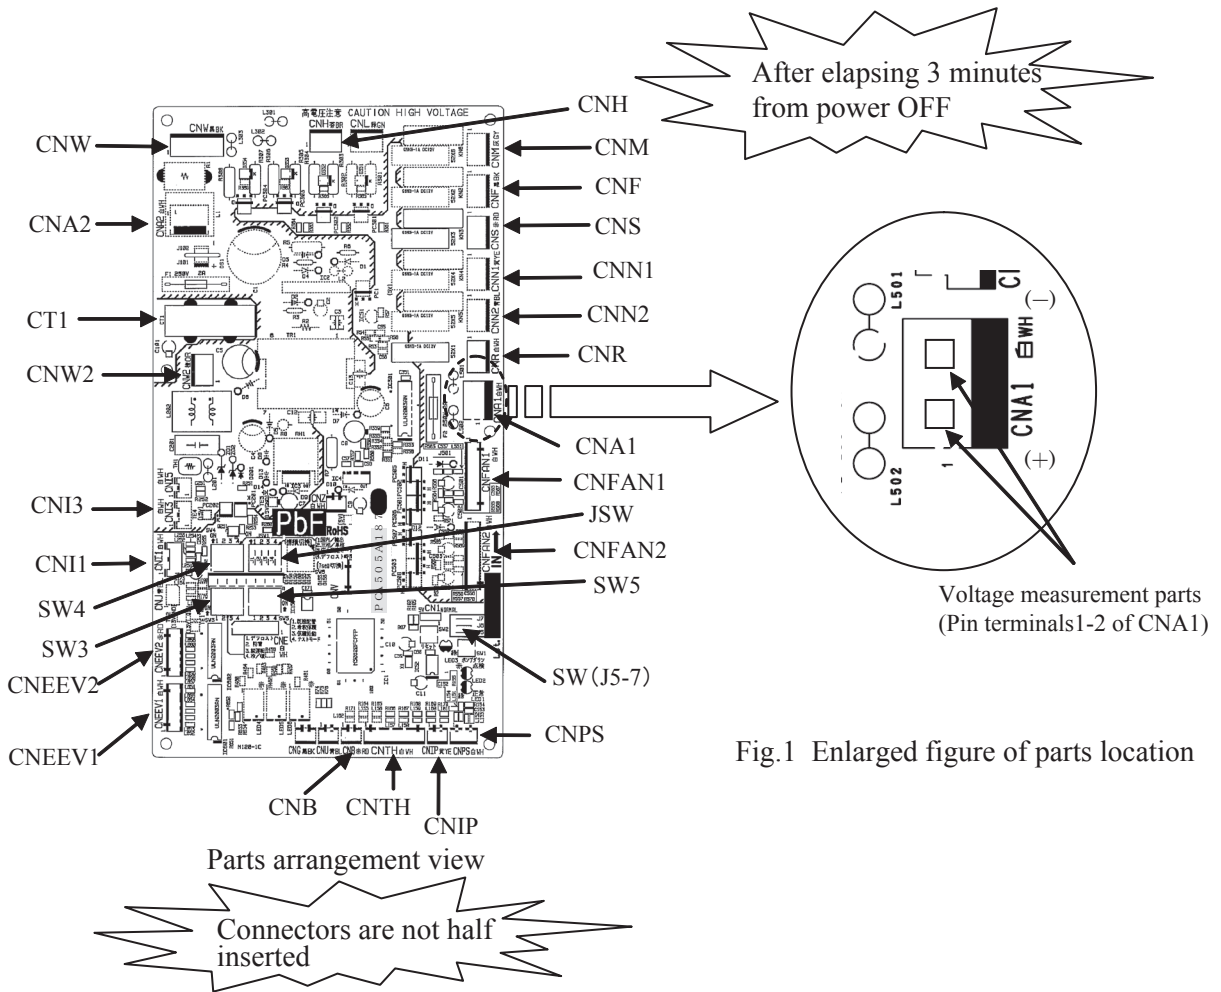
Parts arrangement view (Parts face of PCB (Main))
